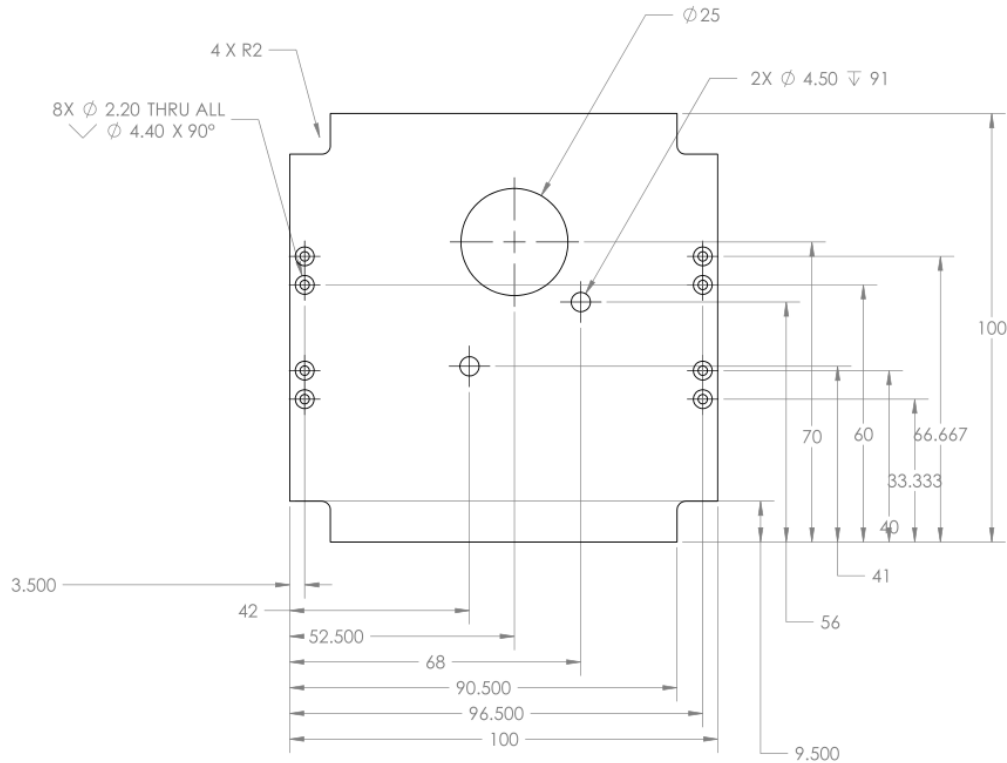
CAD drawing of the power management board for KYSat-2.
